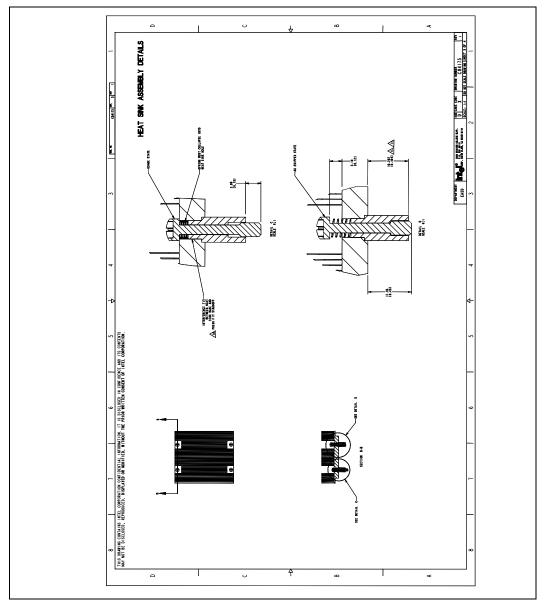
1U CEK Heatsink (Sheet 3 of 4)
